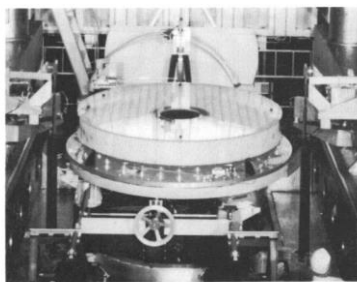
Primary mirror/mount assembly on six-degree-of-freedom table. 06 1198-80
